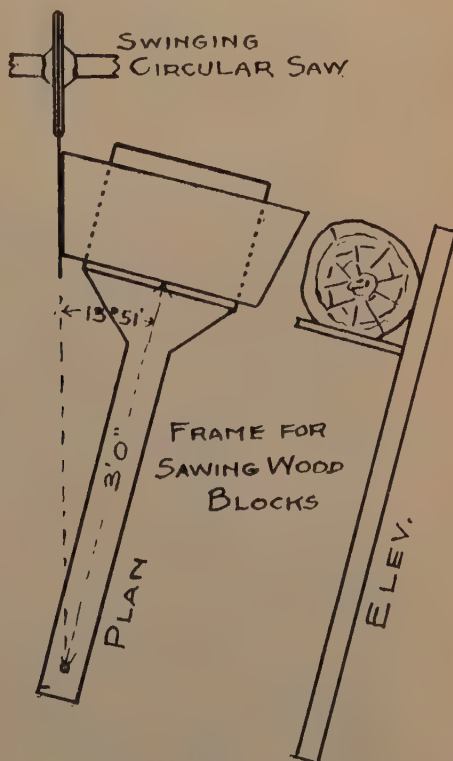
PLAN AND ELEVATION OF FRAME FOR SAWING WOOD BLOCKS.
